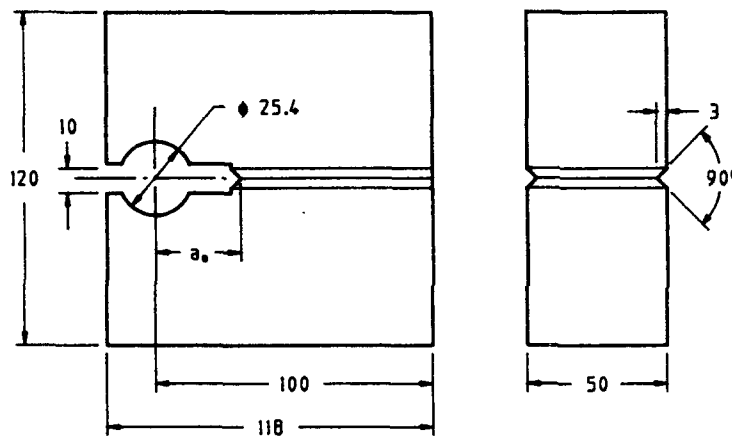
K_{1a} specimen dimensions (showing 3 mm deep face grooves per side).
